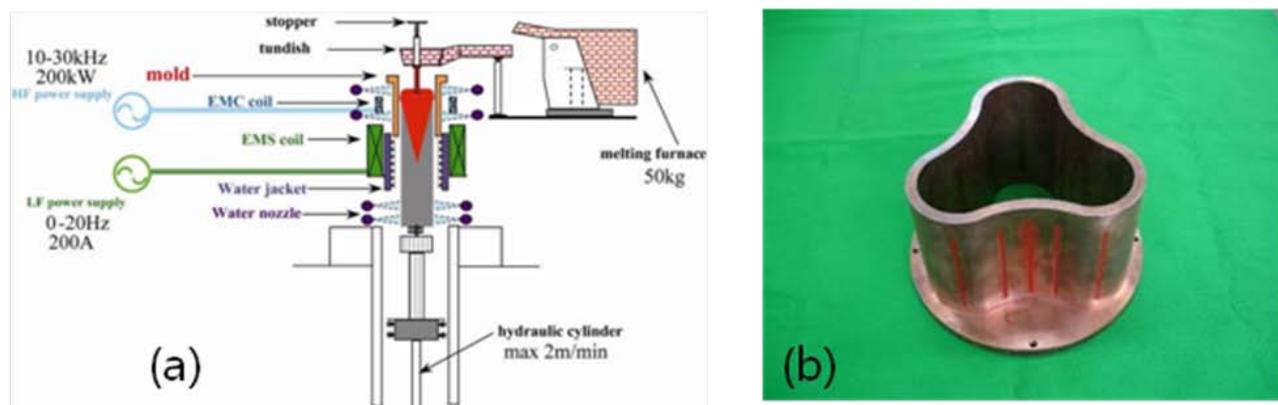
Schematic drawing of the continuous casting machine with electromagnetic casting and stirring apparatus (a) and near net shape mold (b).
